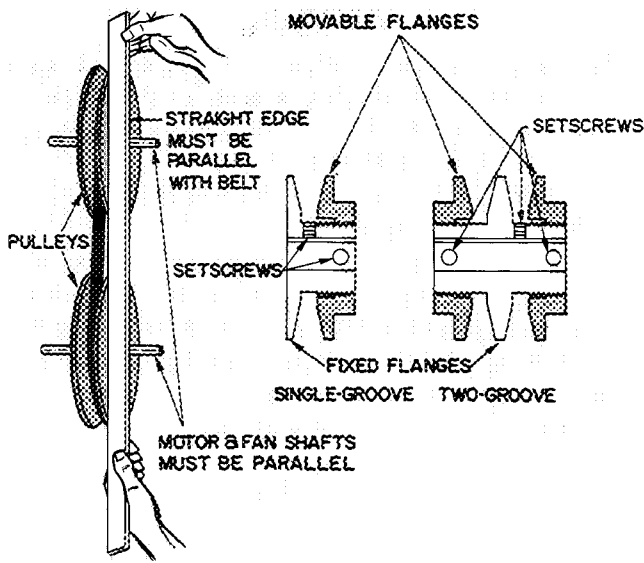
Indoor Blower Pulley Alignment and Adjustment
